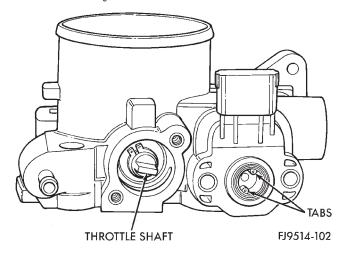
Indexing Throttle Position Sensor—2.5L Engine
